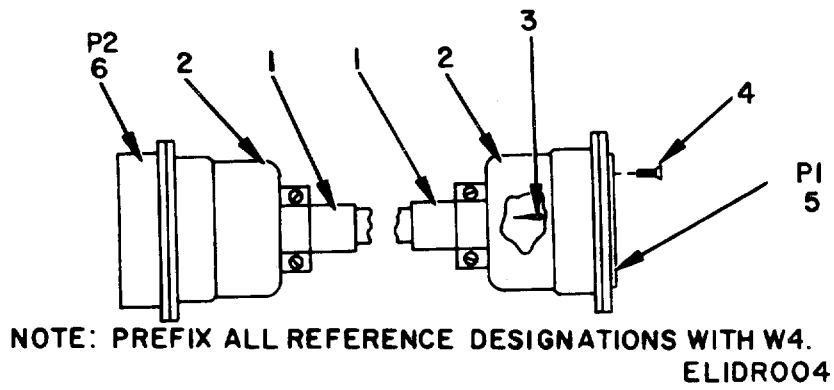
Cable Assembly, Special Purpose, Electrical CX-9000/URM-157.
